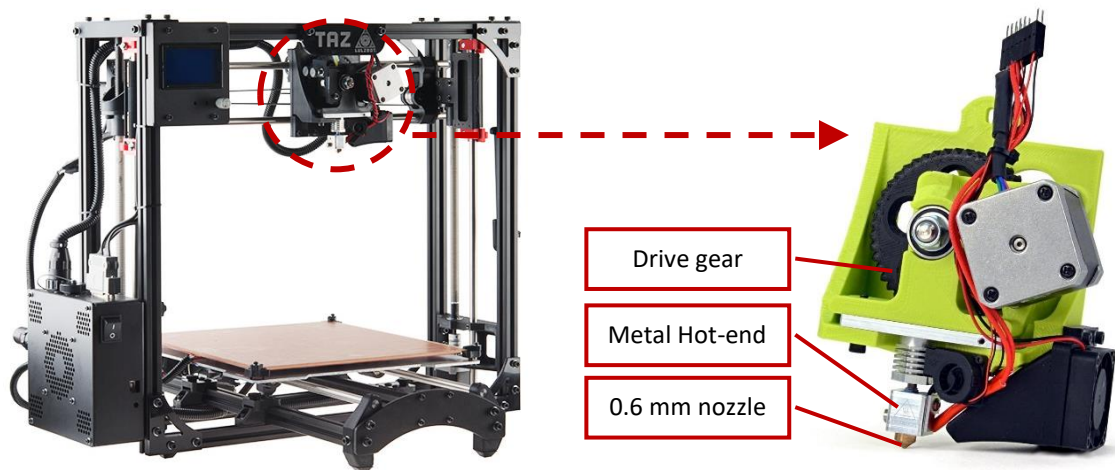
TAZ 5 3D printer and the Flexytruder unit
